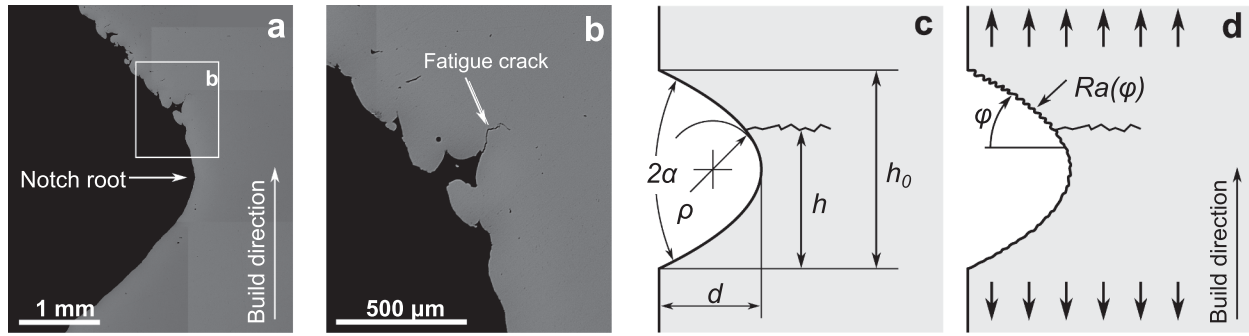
(a) Cross section of a notch geometry built by AM and subjected to fatigue loading. (b) Detail of a fatigue crack initiating from a defect. (c) Generalized notch geometry with dimensions. (d) Schematic illustration of a notch geometry built by AM, with higher surface roughness in the down-skin surface.
